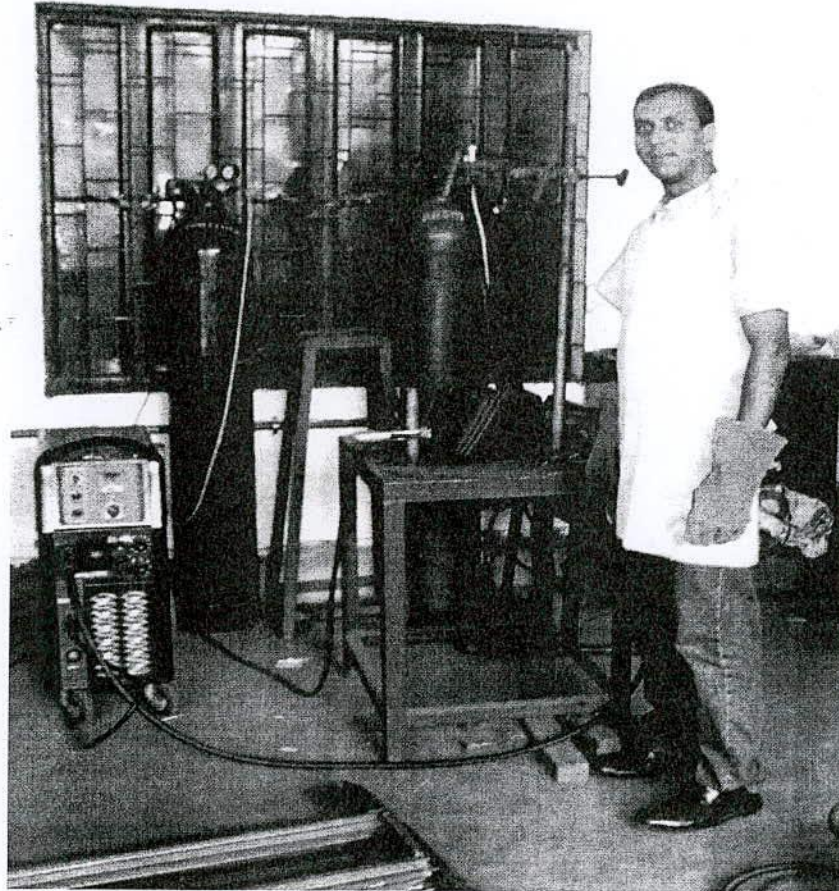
(a) Photograph of MIG Welding Machine, Equipments and Welder
